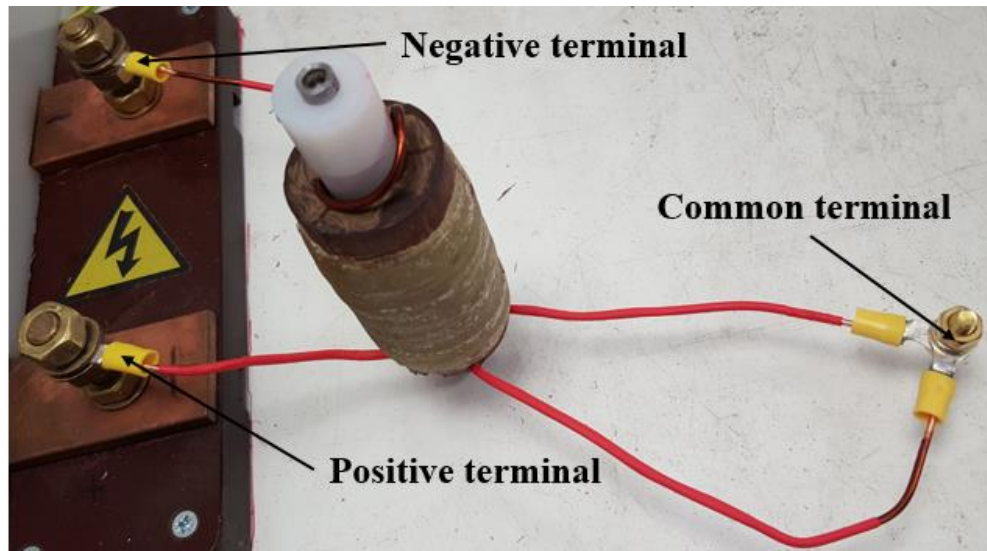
Connection of double-sided fixture with the magnetizer.
